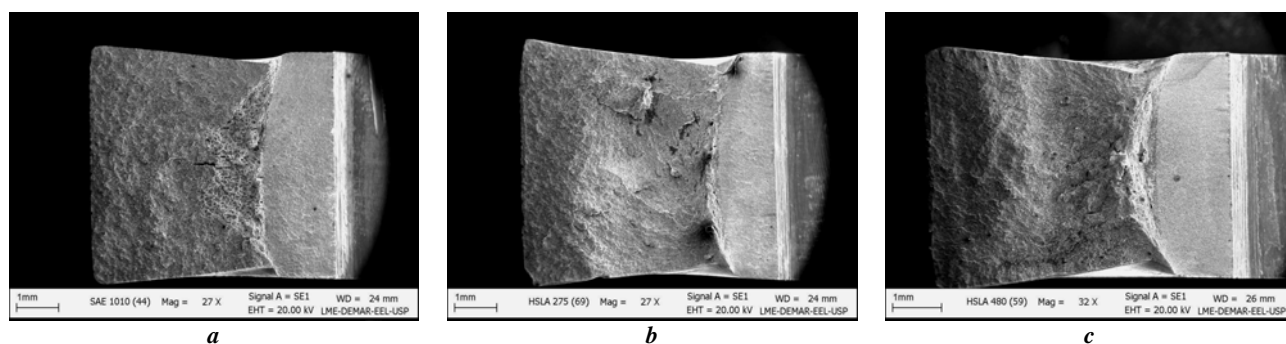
Fracture surfaces of CTOD specimens: (a) SAE 1010 AA, (b) S275JR, (c) RD480
